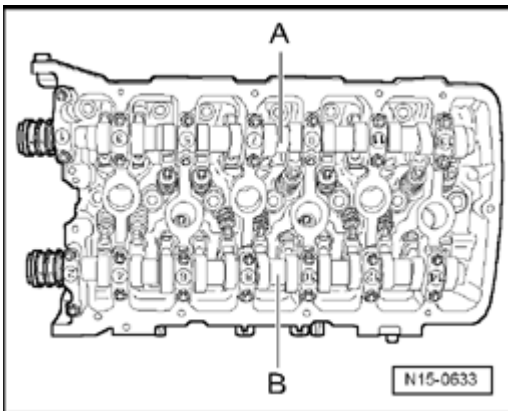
Intake/Exhaust Camshaft - Cylinder Bank 1 (Right)
